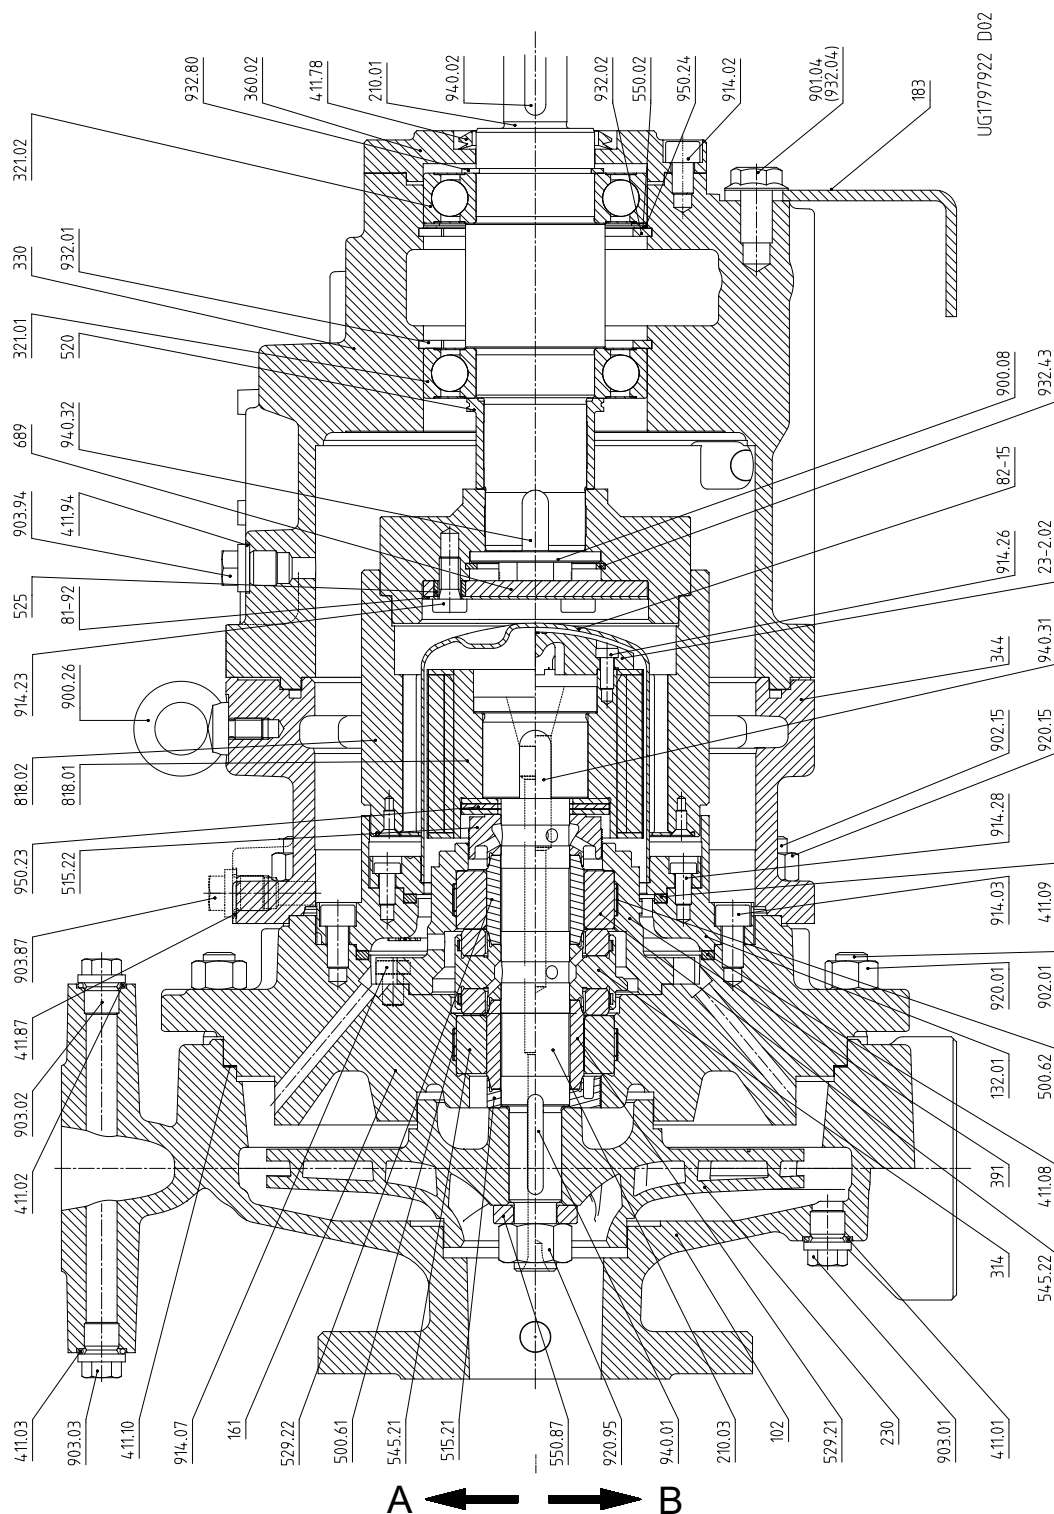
General assembly drawing of model with bolted cover, with intermediate piece
